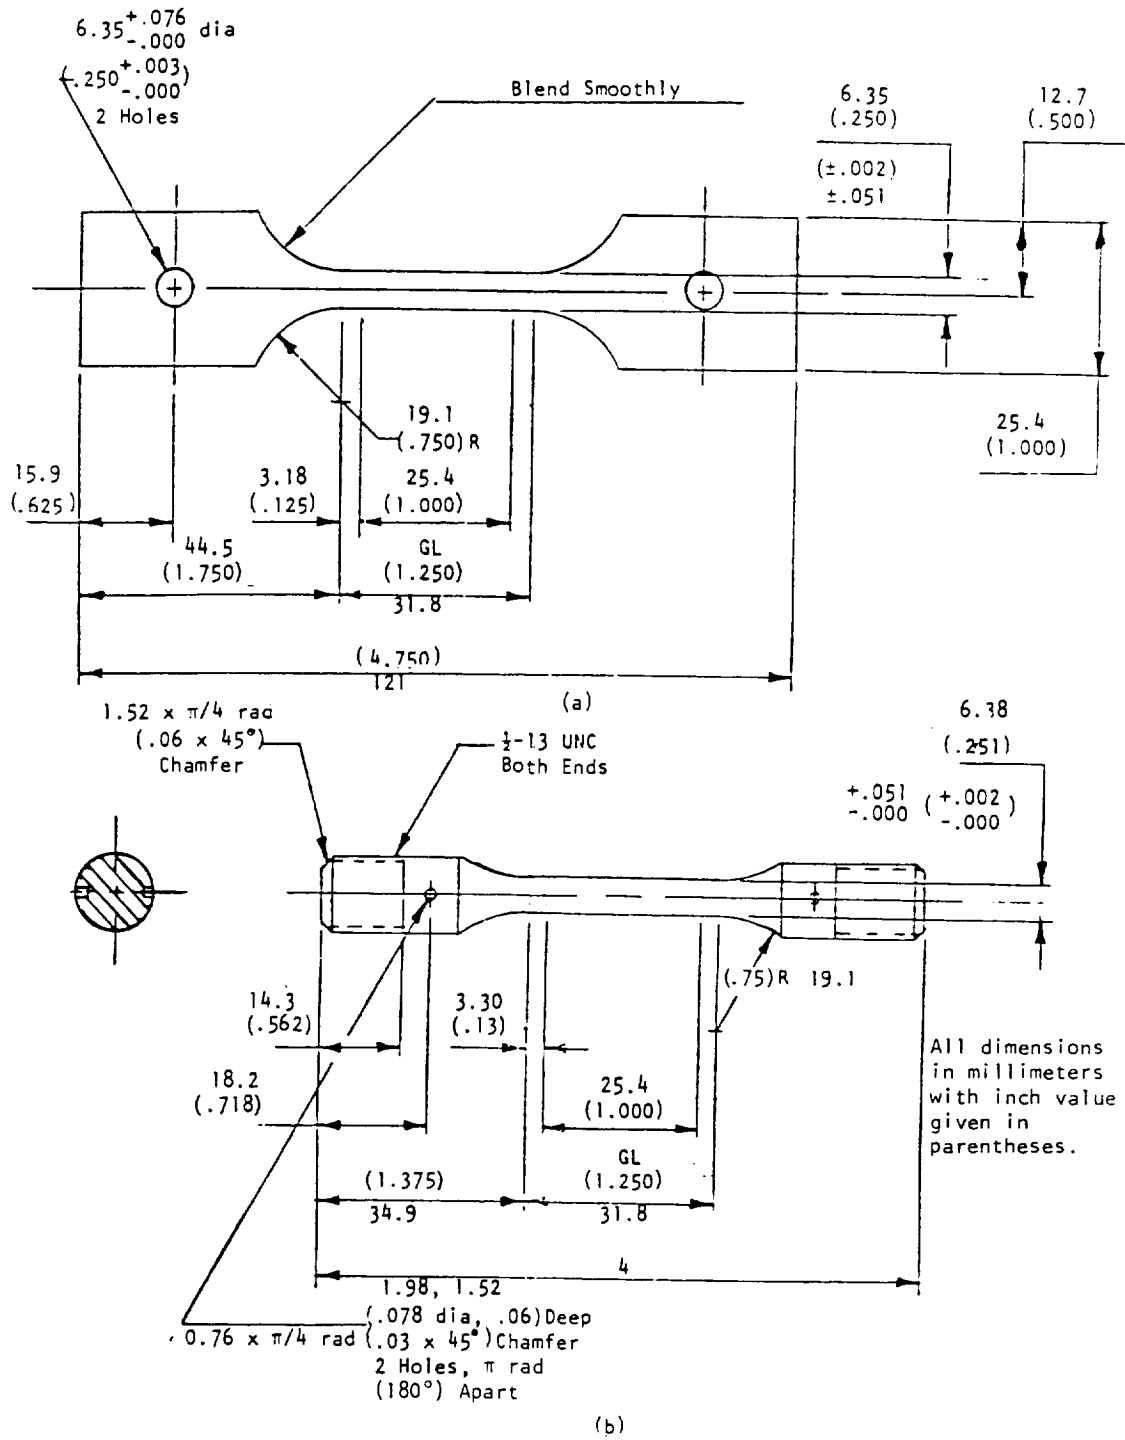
Creep-rupture specimen design. (a) Wrought (sheet), (b) cast.
